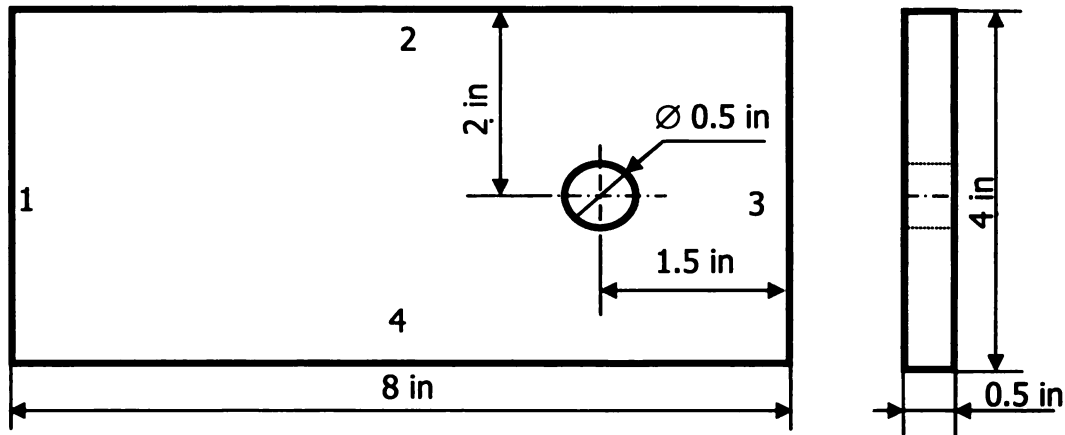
Dimensions for the aluminum plate and *Type 2* specimen.
